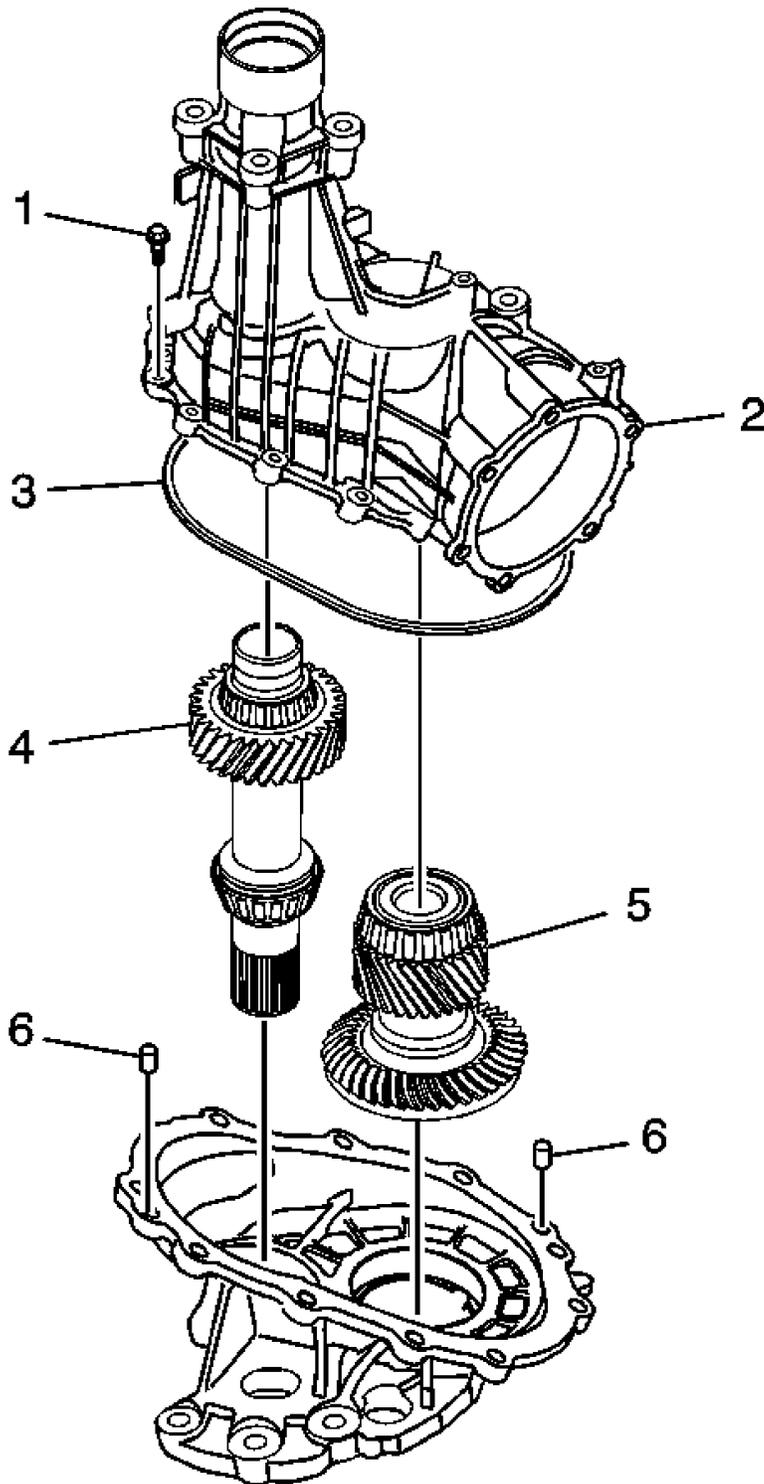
Identifying Right Transfer Case, Input And Output Drive Shaft
